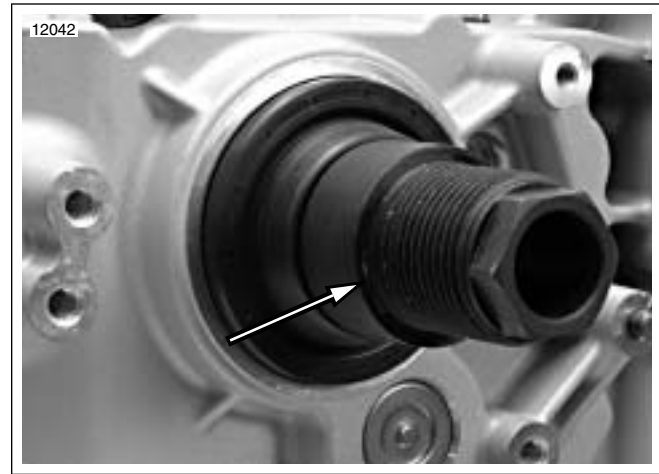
Install Adapter (Part No. HD-47856-4) (Typical)
